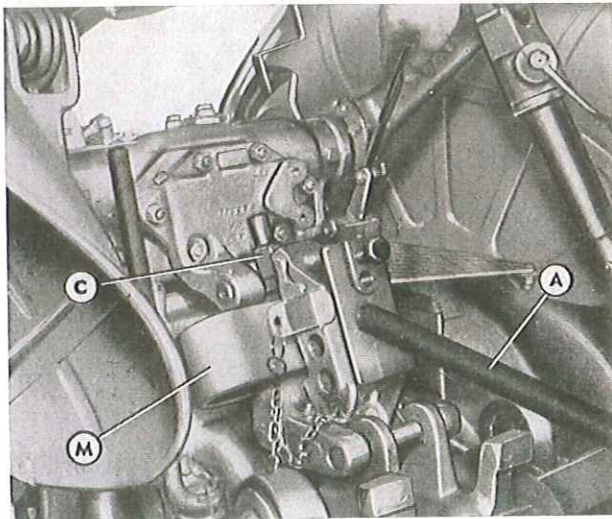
Checking the play between roller and quadrant using lever A 197016 (A) and the «GO-NOGO» gage C 497015 (C) which locks the upper link support in position thus keeping spring M under load.
